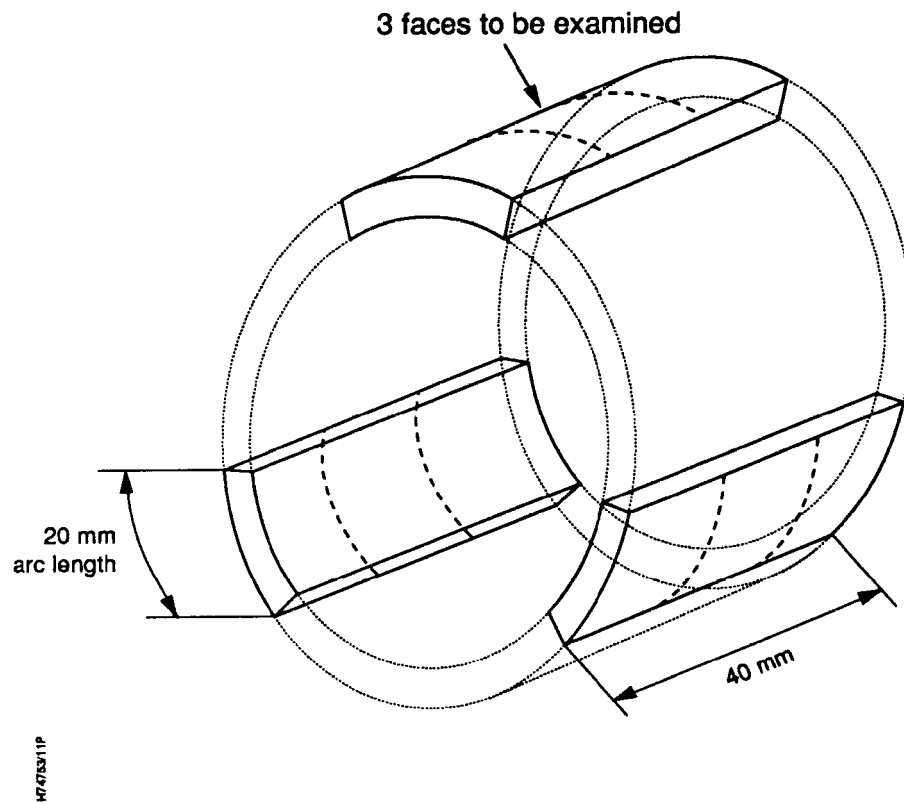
FIGURE J SECTIONING OF ALTERNATIVE SPECIMENS FROM SEAMLESS PIPE AND FITTINGS
